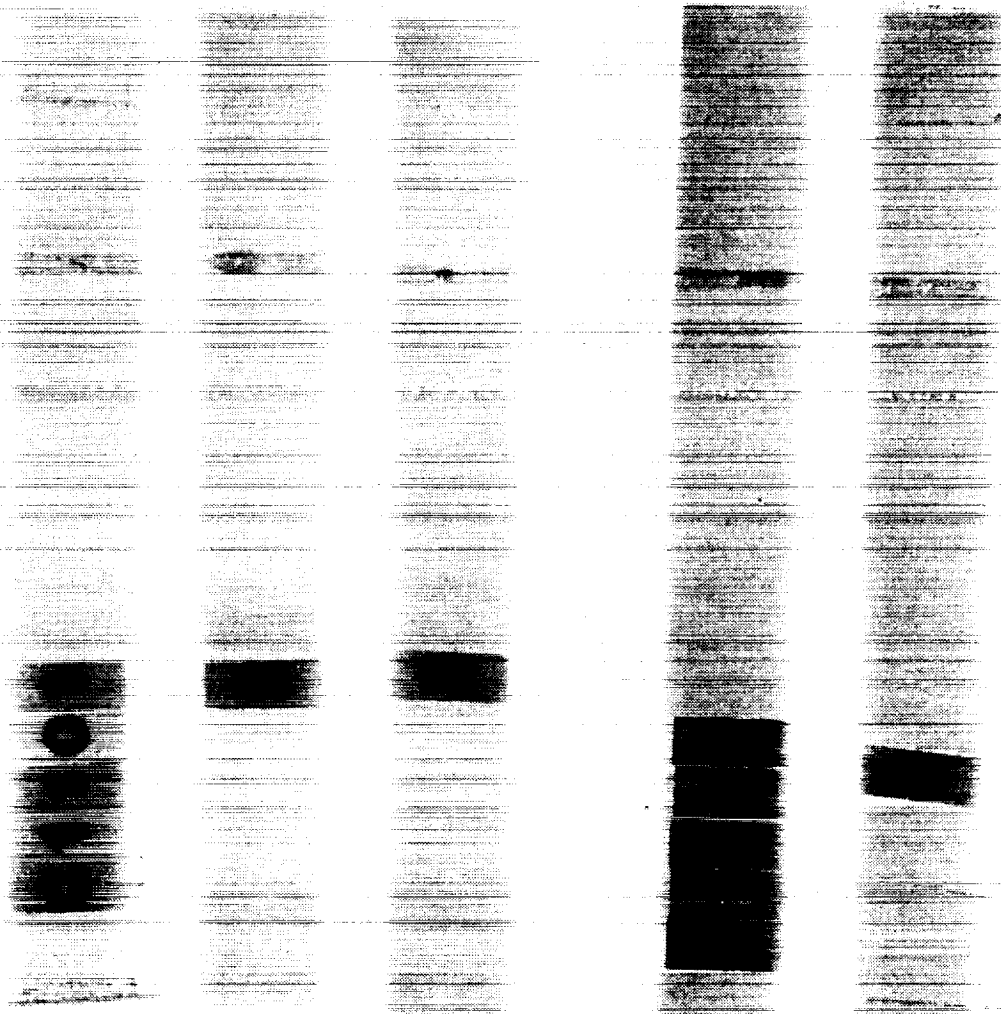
Contact Prints of Radiographs Showing Porosity in 0.068 in. (1.7 mm) Thick 2095-T6 to 0.120 in. (3.0 mm) Thick 2095-T8 weld with 0.001 in. (0.02 mm) Removed by Chemical Milling.
